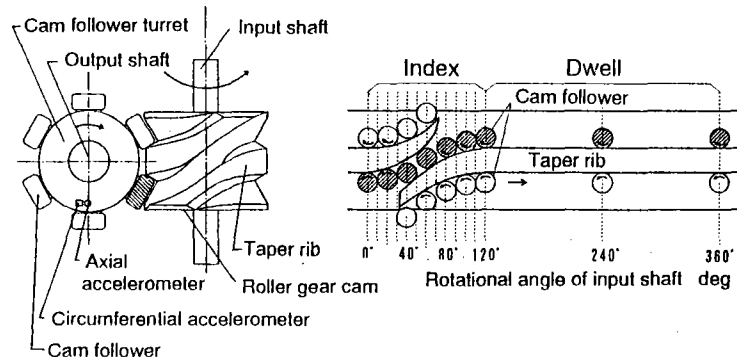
The mechanism of the roller gear cam assembled in the driving unit and the motion of the cam follower projected onto a plane during one revolution of the roller gear cam
